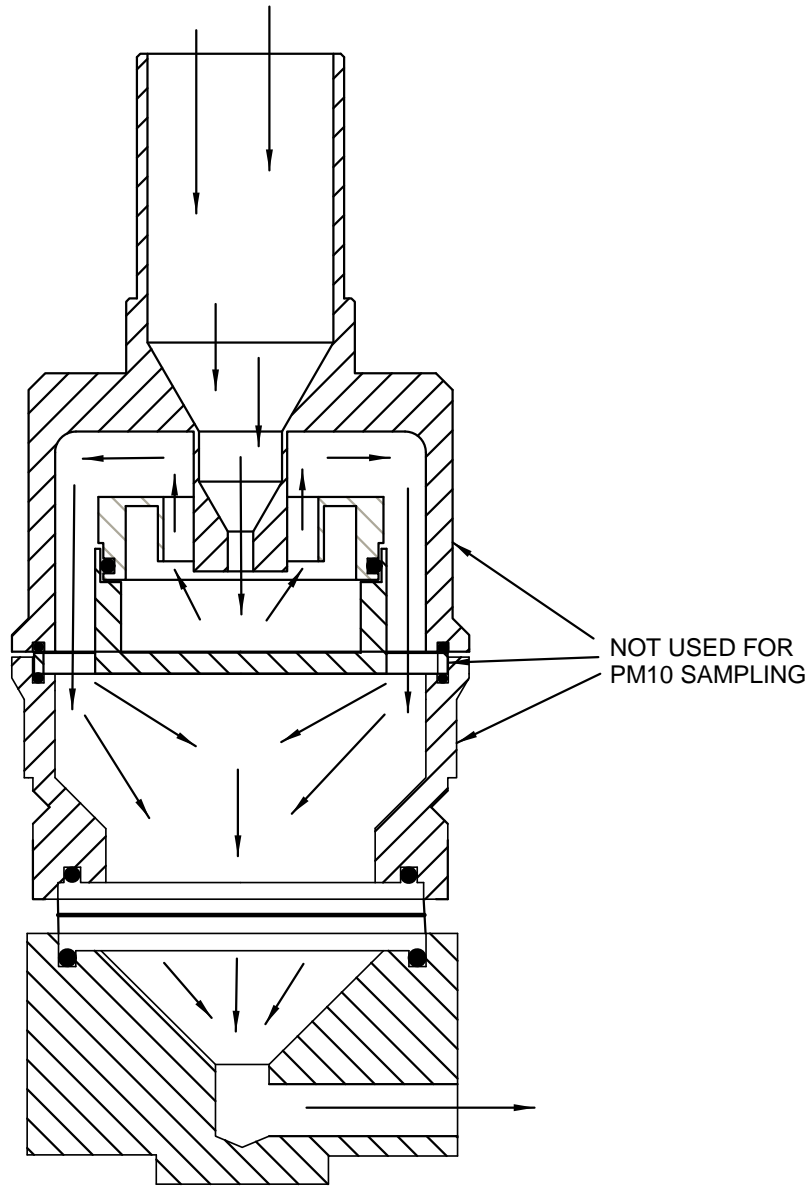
Sectional View of WINS Impactor [NOT USED FOR PM10]
